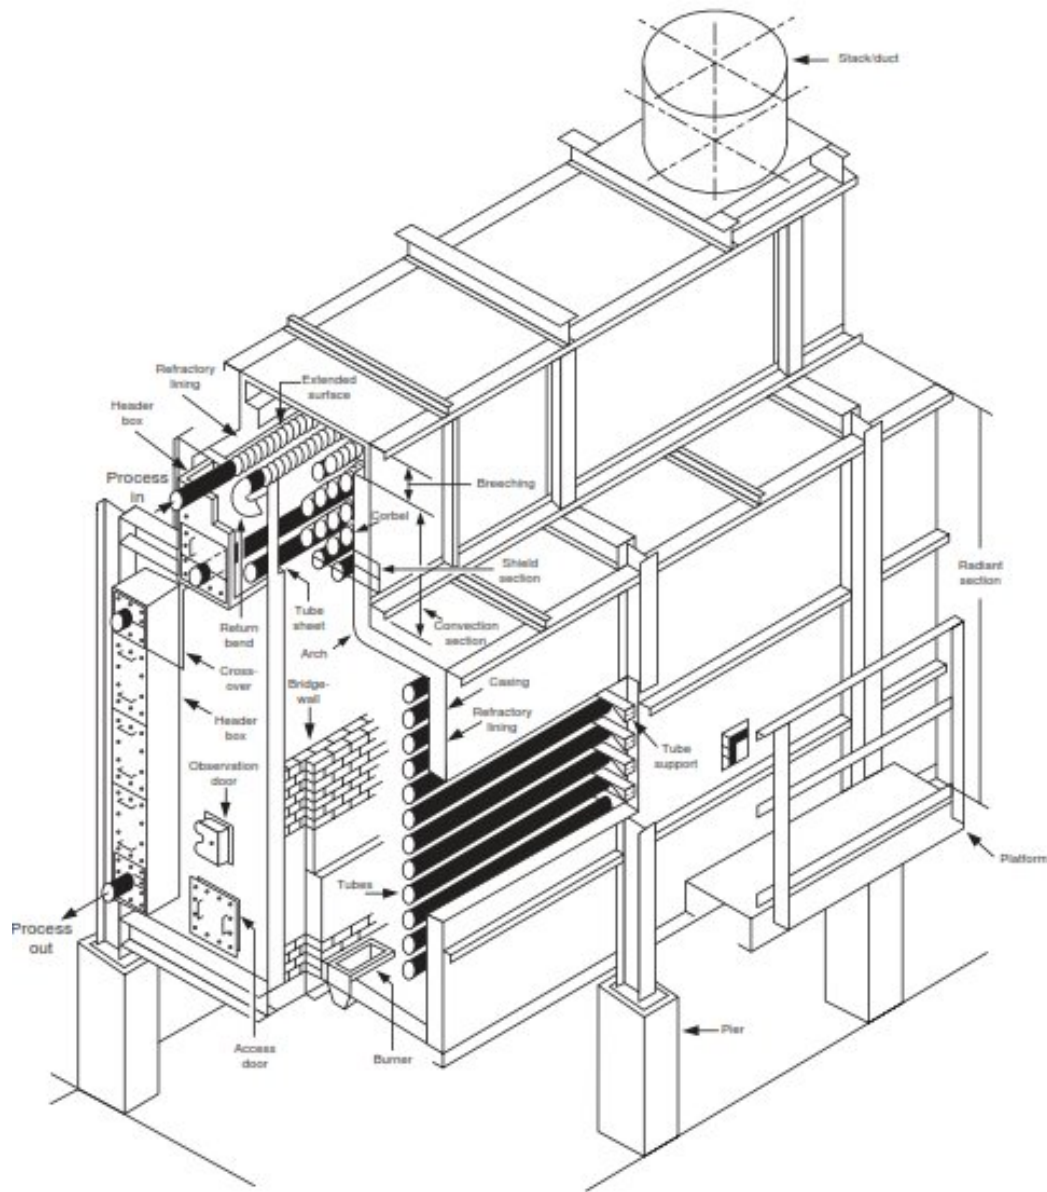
Box-type Heater with Horizontal Tube Coil Showing Main Components
